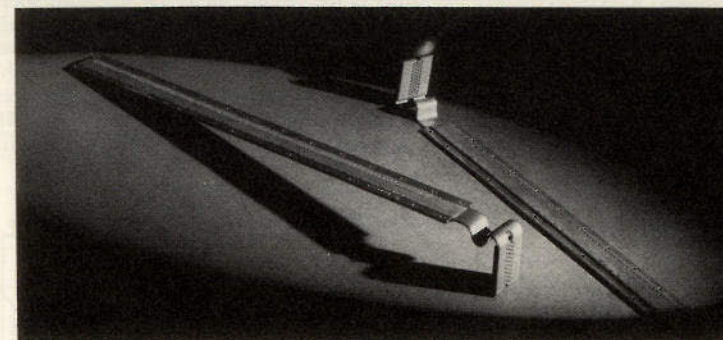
Z-plane interconnection form provided in hybrid multilayer flexible printed board.
